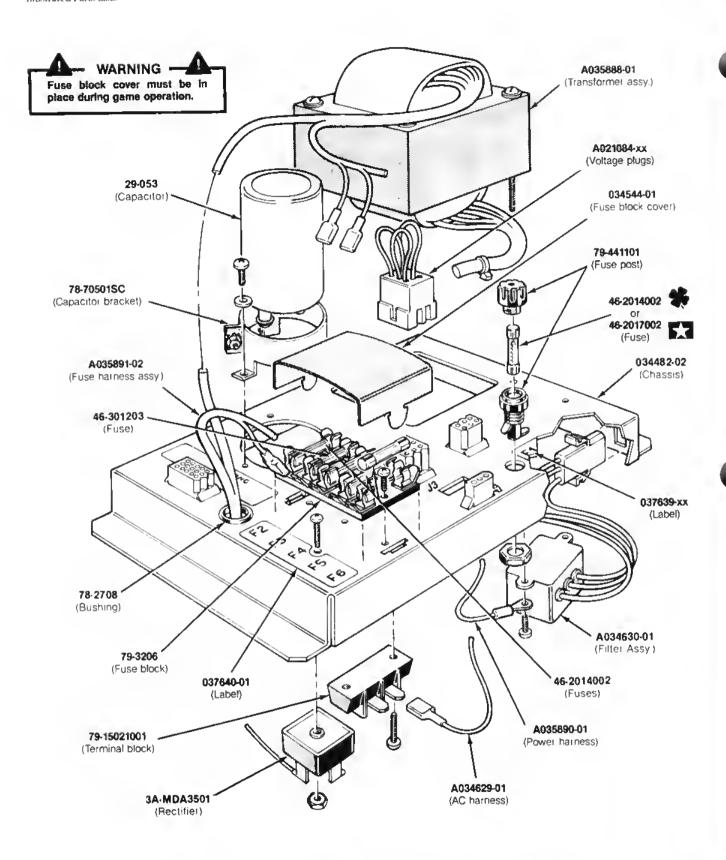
Color Raster-Scan Power Supply Assembly A037671-01 & -03 H
